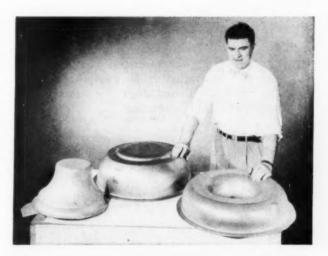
A high-pressure flexible die method known as Hydroforming, was used to produce these three large components from type 302 stainless steel. The part on the left, with the gently rounded sides, is formed in two draws from a 0.125-in. thick by 21 in. di-Maximum depth of the part ameter blank. is 8 in., and inside diameter is 13 in. center component is formed in one draw. A 16gage 32-in. diameter stainless blank is drawn to 221/4 in. ID by 73/8 inches deep with rounded sides and a concentric rib on the base. The part on the right is formed in two draws from a 32in. diameter, 16-gage stainless blank. Dimensions of the finished part are: 211/2 inches ID, $4\frac{3}{4}$ in. deep with a returned center 4 in. deep
